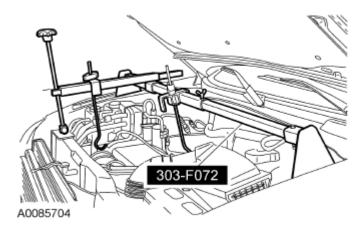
Identifying Engine Support Bar Courtesy of FORD MOTOR CO.
